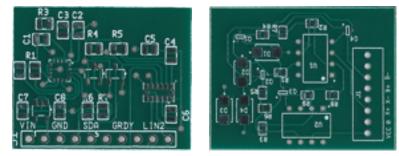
IMU (left) & Magnetorquer (right) PCBs
